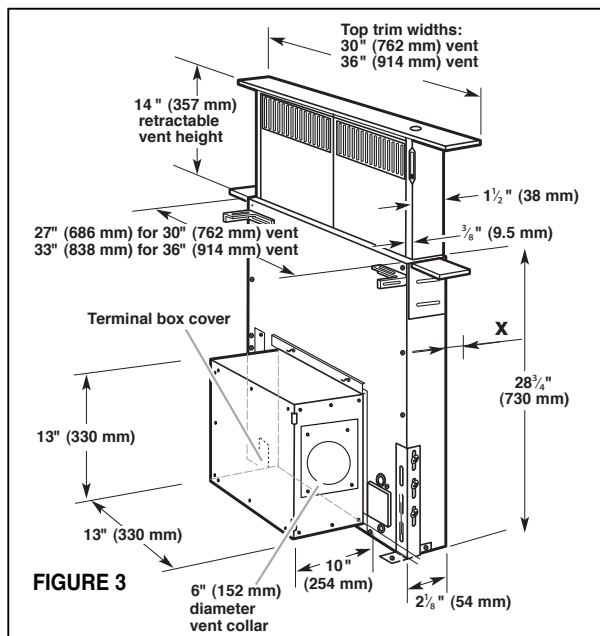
Dimensions with IBDD600-B Internal blower box
